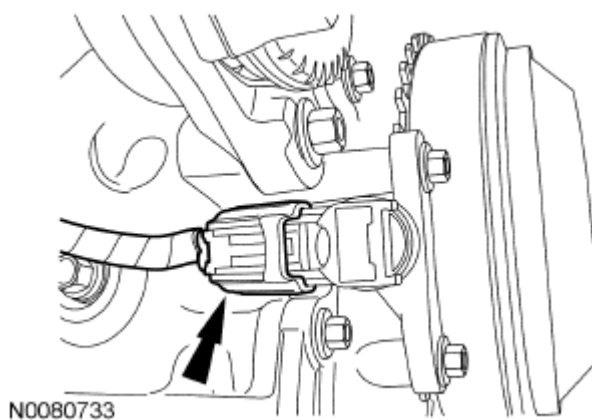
Locating Crankshaft Position Sensor Electrical Connector
